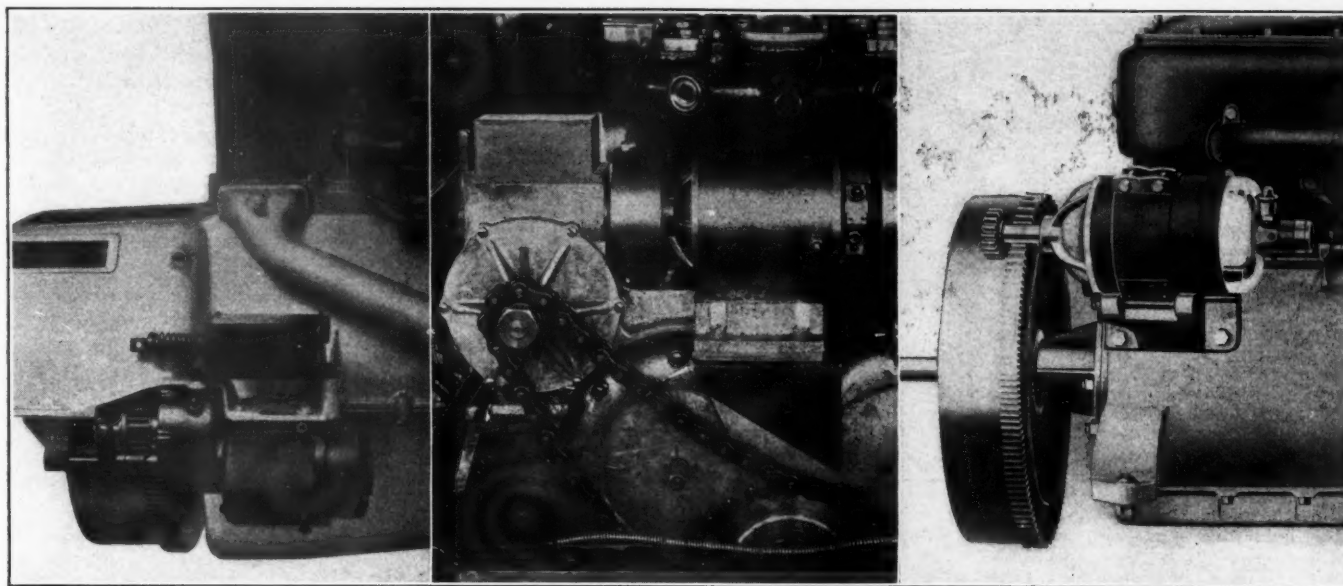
Left, underneath position of Wagner starter on Moline Knight with switch immediately above. Center, front end installation of Hartford motor which drives through worm and chain, using the momentum of small flywheel. Right, application of Rushmore starter direct to flywheel of Regal
